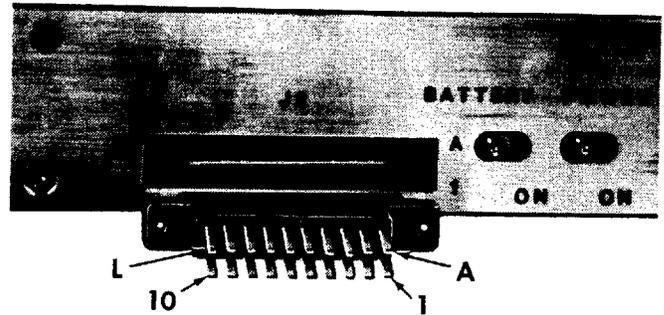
Position of 20-Pin Edge Connector for Installation on Control Processor Chassis
